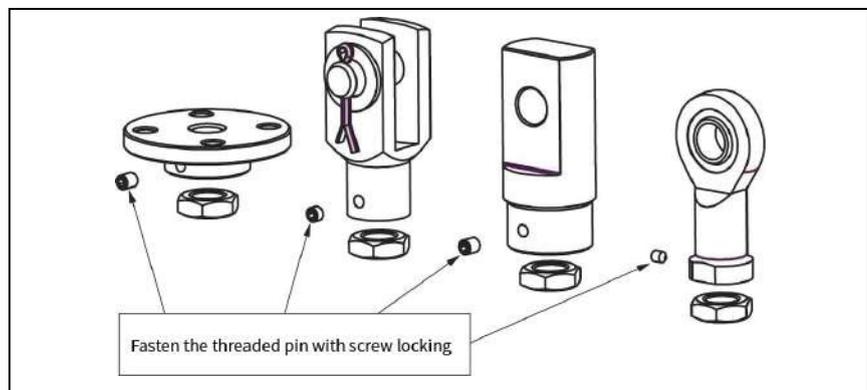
Fix parts such as Fixing flange, Forked end, Pivot bearing end, Rod end, after setting the position.
